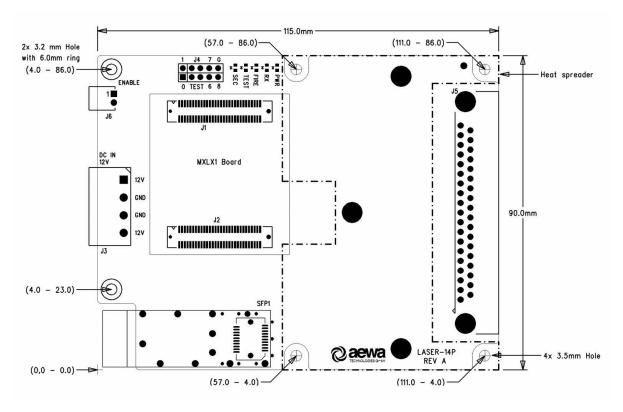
LASER-14P MECHANICAL DIMENSIONS
